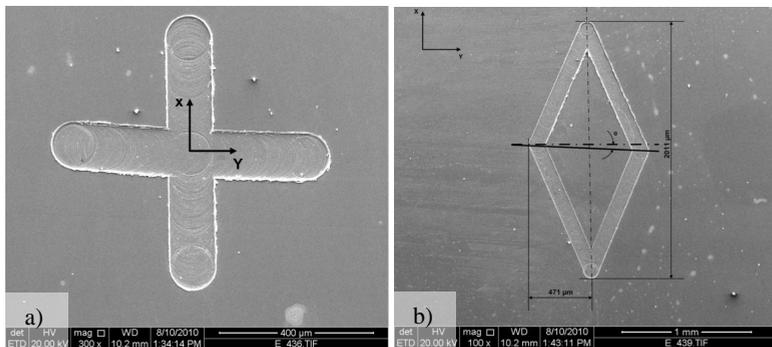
Milled cross-shaped structure and outline of the workspace using a 120 μm cutting tool (SEM)
